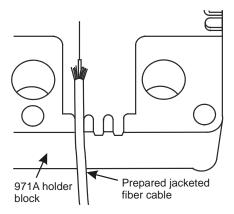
971A Holder Block with Jacketed Fiber Cable
